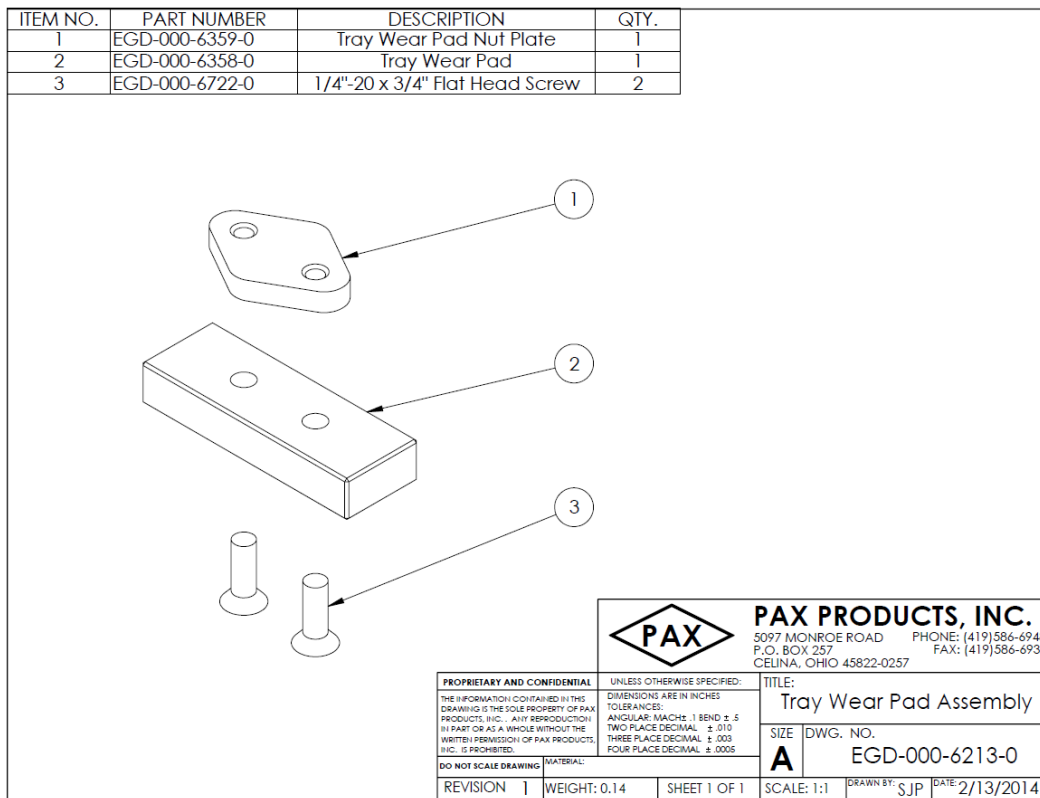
EGD-000-6213 TRAY WEAR PAD ASSEMBLY
